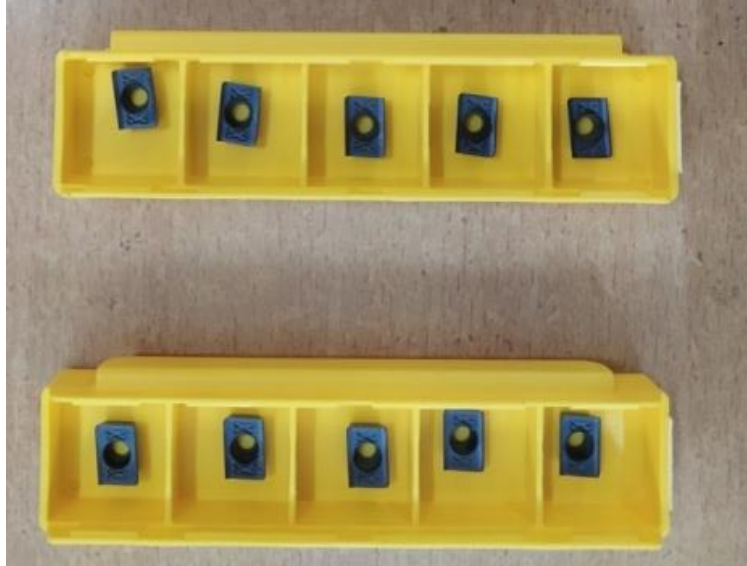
Cutting Tool Inserts (ADET 090308 SR 42)
